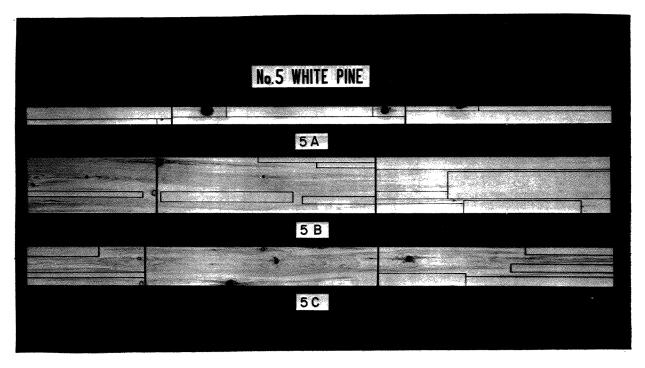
Cutting layout on selected No. 5 White Pine boards. Yields for these boards were: 5A - 78.1%; 5B - 40.3%; 5C - 22.5%.
